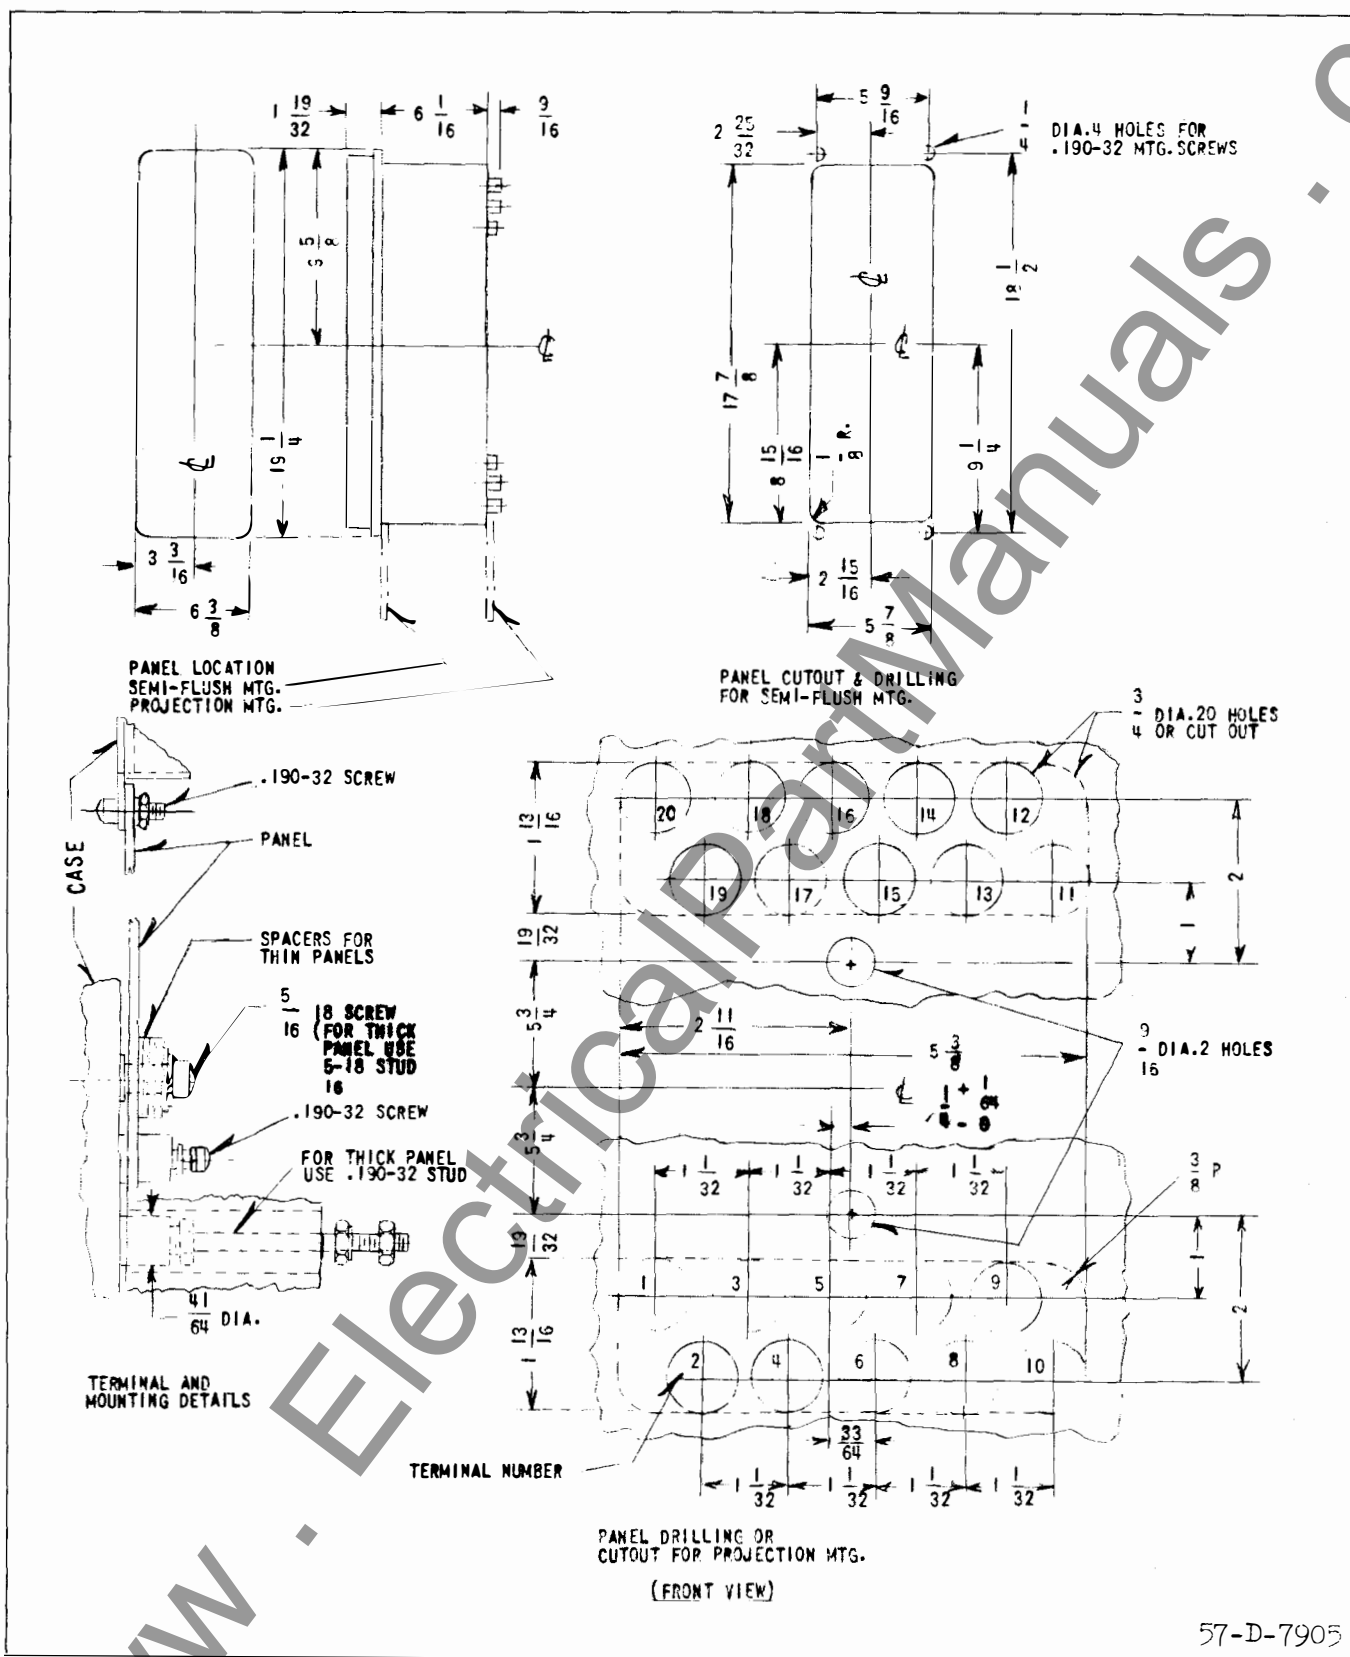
Outline and Drilling Plan for the Type FT42 Case
